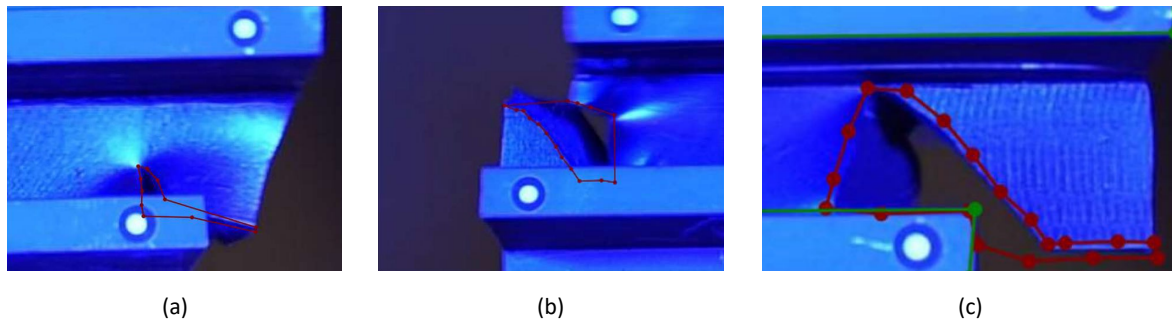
(a) Slightly Closed Crack under Low Deformation; (b) Crack Initiation at the Center of the Adhesive Joint, Crack Tip Not Visible; (c) Highly Deformed Crack with Distorted Crack Geometry
